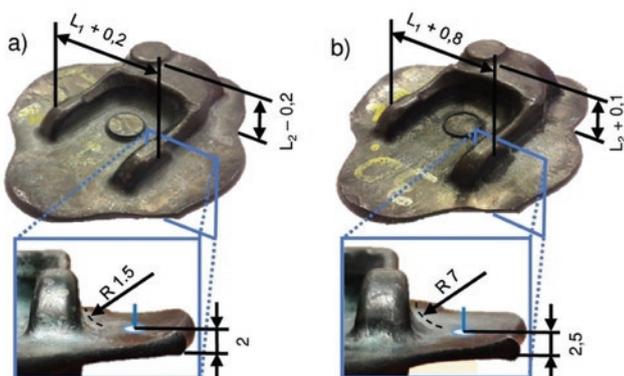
The view of the forgings after the forging process: a) initial forging phase – unworn tools, b) final forging phase (worn die inserts) – enlarged dimensions of the tool and the forging
